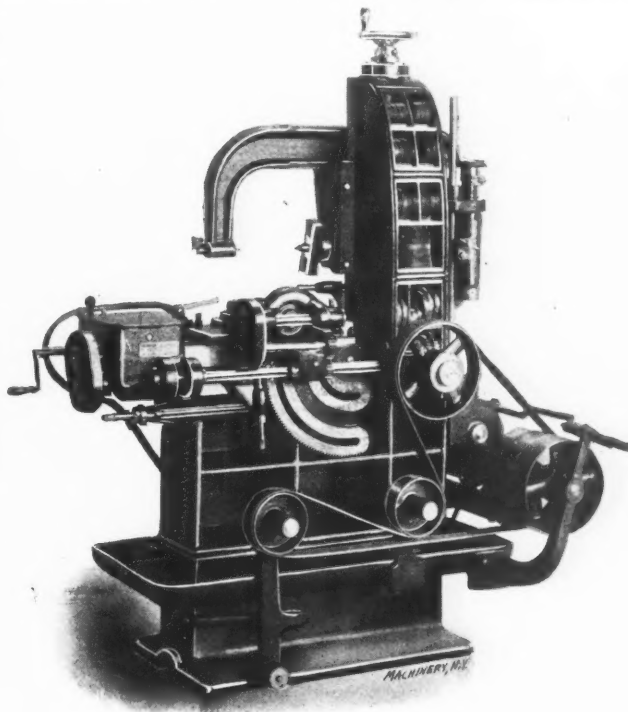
Rear of Machine, showing Provisions for Cutting Bevel Gears.
